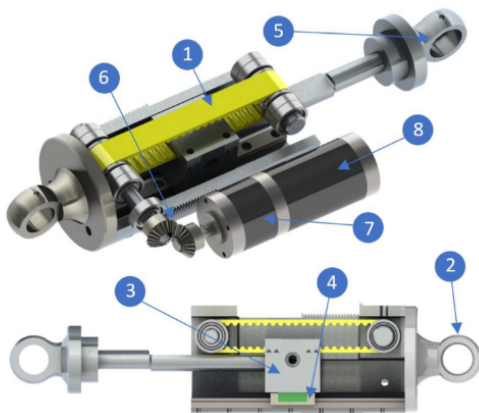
Vibration energy harvester using synchronous pulleys. Linear movement is converted to rotary movement with the use of synchronous pulleys and belts. The pulleys are fixed to two shafts that rotate on a system of bearings. The power shaft transmits rotation to the bevel gears. The bevel gears correct the rotation axis towards the gearbox and generator with 90° [22].
